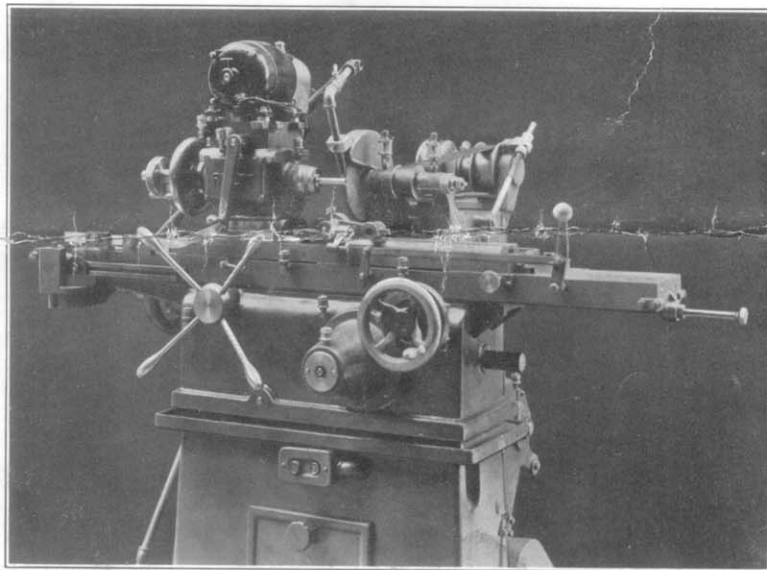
104-Grinder with External Grinding Attachment and Tip-over Diamond Holder, set for grinding work held in collet
